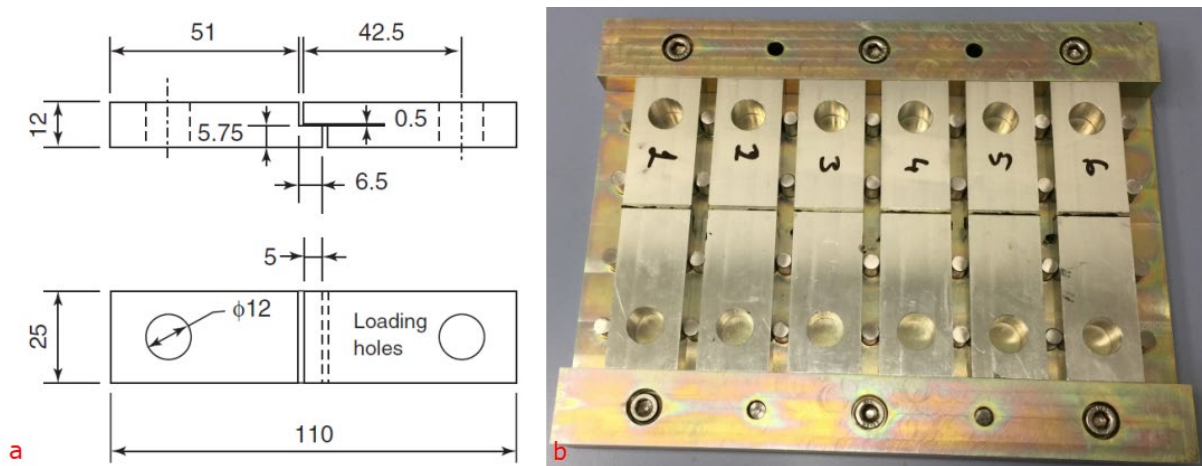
TAST specimen dimensions taken from [17] (a) and curing assembly with 1.5 mm thick shims (b).
